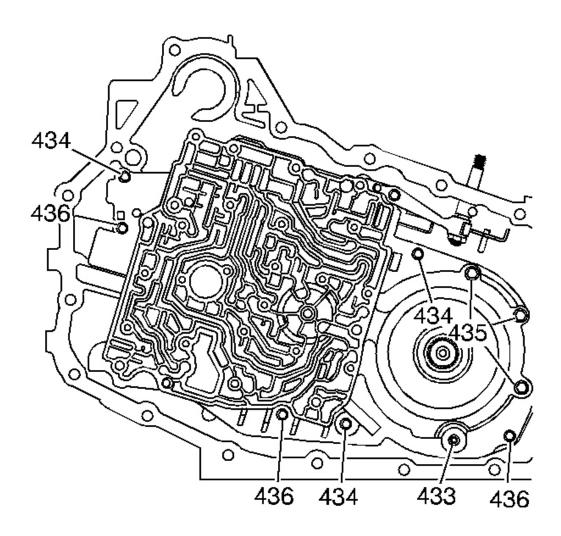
Identifying Transaxle Case Cover Bolts Locations Courtesy of GENERAL MOTORS CORP.
